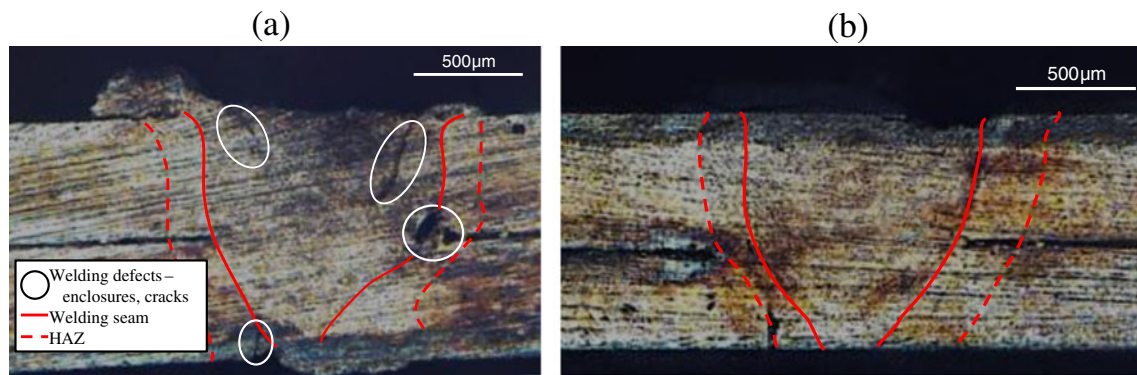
Laser welding of steel tests a without and b with preheating ($P_L=1,800$ W and $u_w=100$ cm/min)
